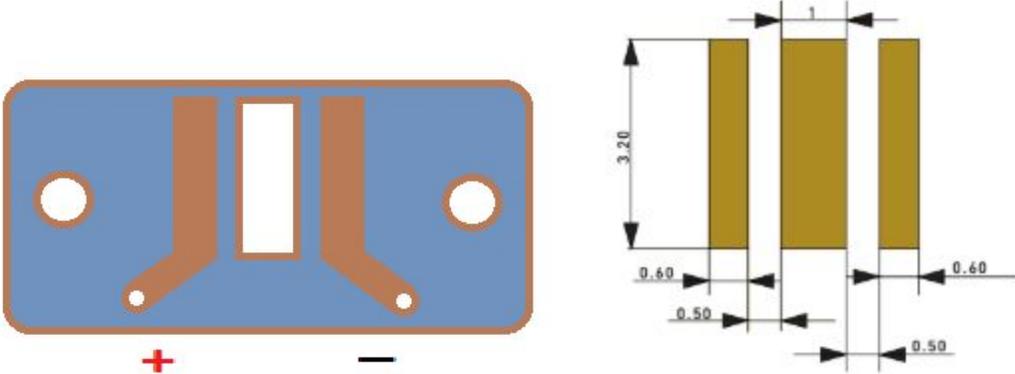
Recommended PCB board design and LED contact pad measurements (a-b)
